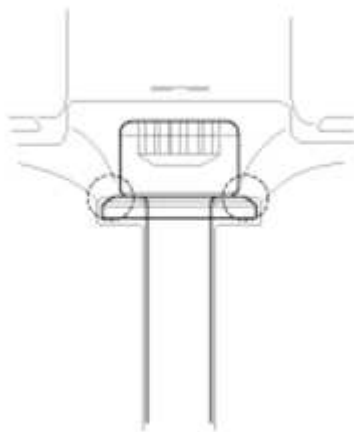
Installing Washer Of Non-Preassembled Washer Bolts
